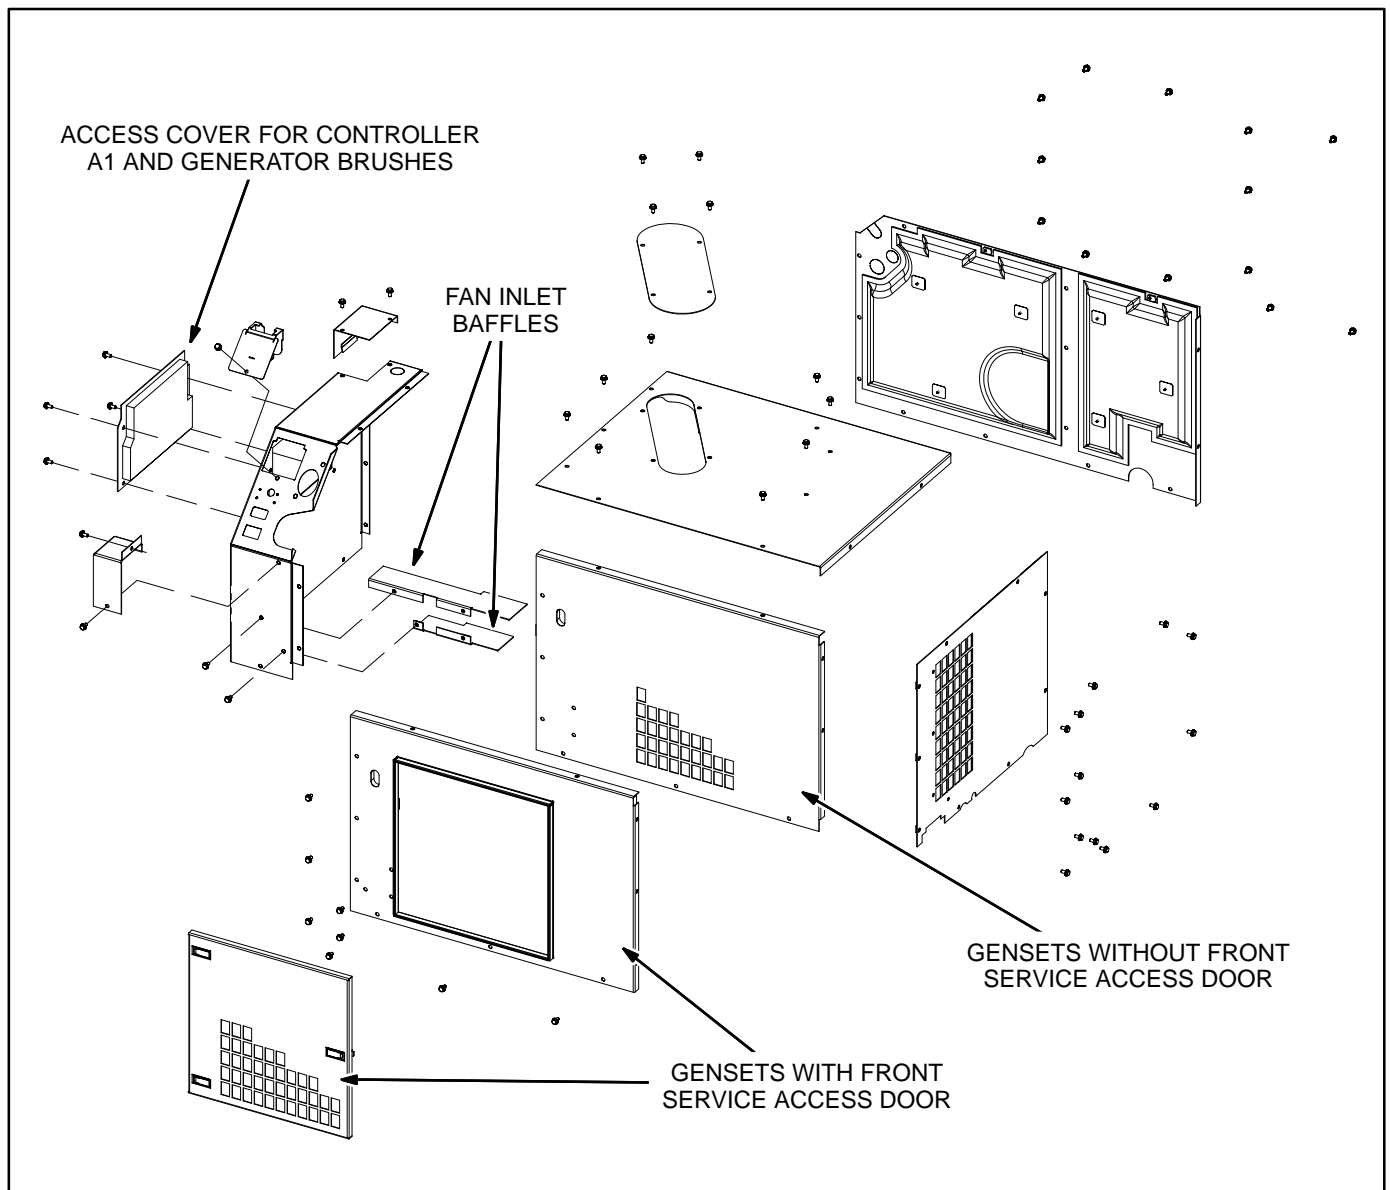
THE GENSET HOUSING PANELS AND THEIR MOUNTING SCREWS
